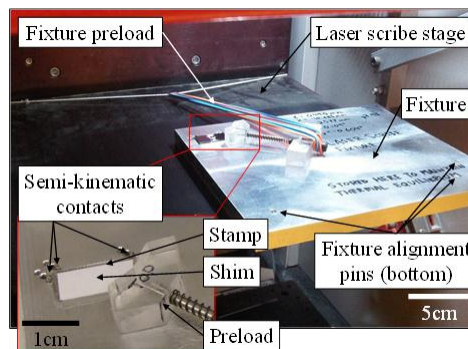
Rubber band alignment on fixture to ensure non-friction locked preload.
